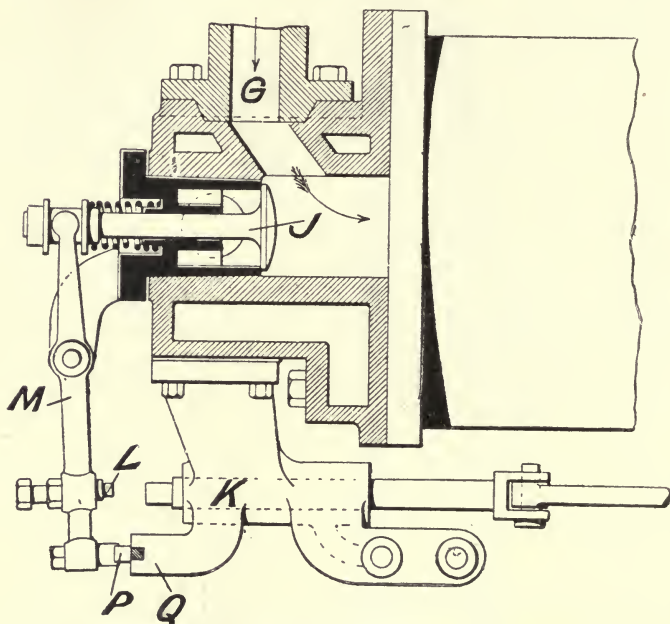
Campbell Oil Engine (horizontal section through exhaust valve).
